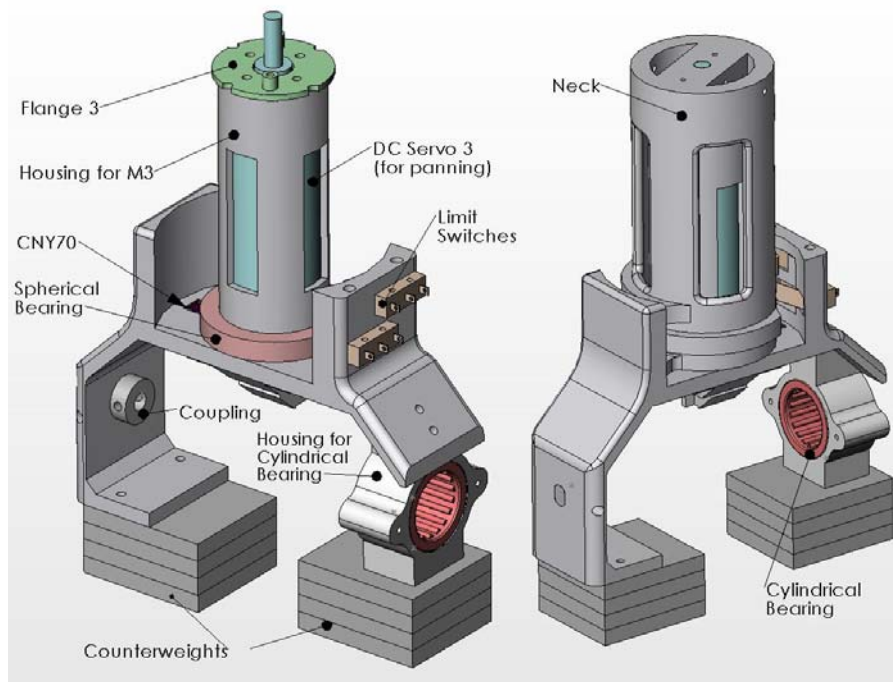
Assembly of the 3rd DOF of the Neck Mechanism
